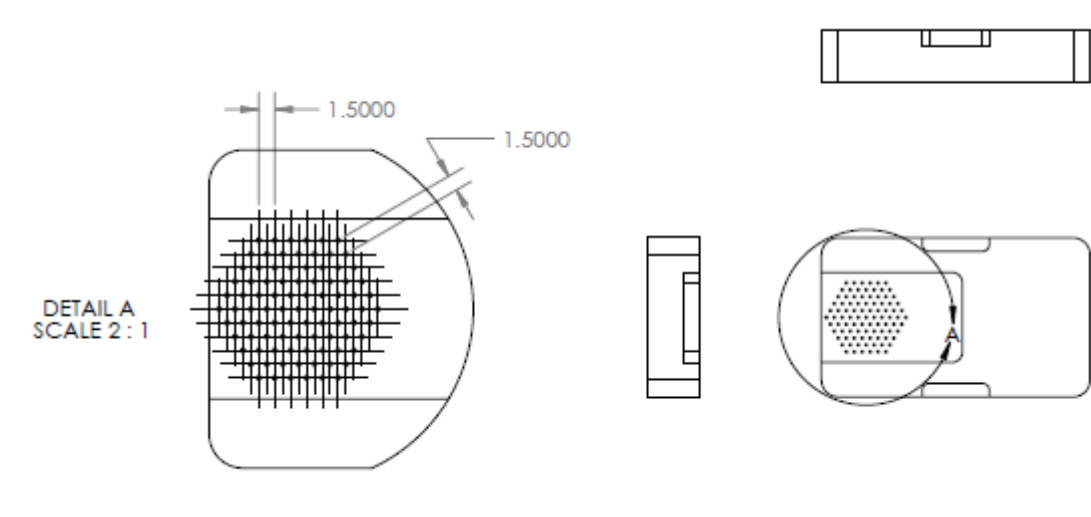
Mold with 1.5 mm hexagonal spacing pattern (dimensions in mm).
